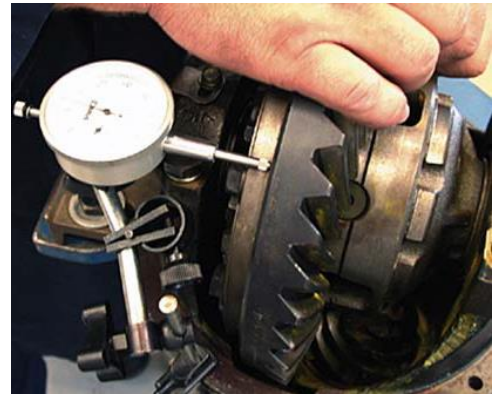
Location of the dial indicator used to measure carrier endplay
